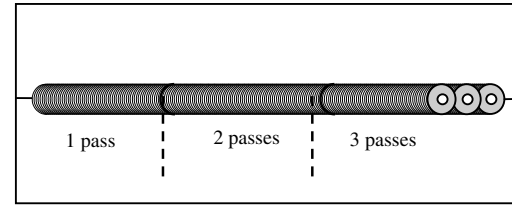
Schematic representation of overlapping weld passes in 6063-T6 aluminium alloy.
